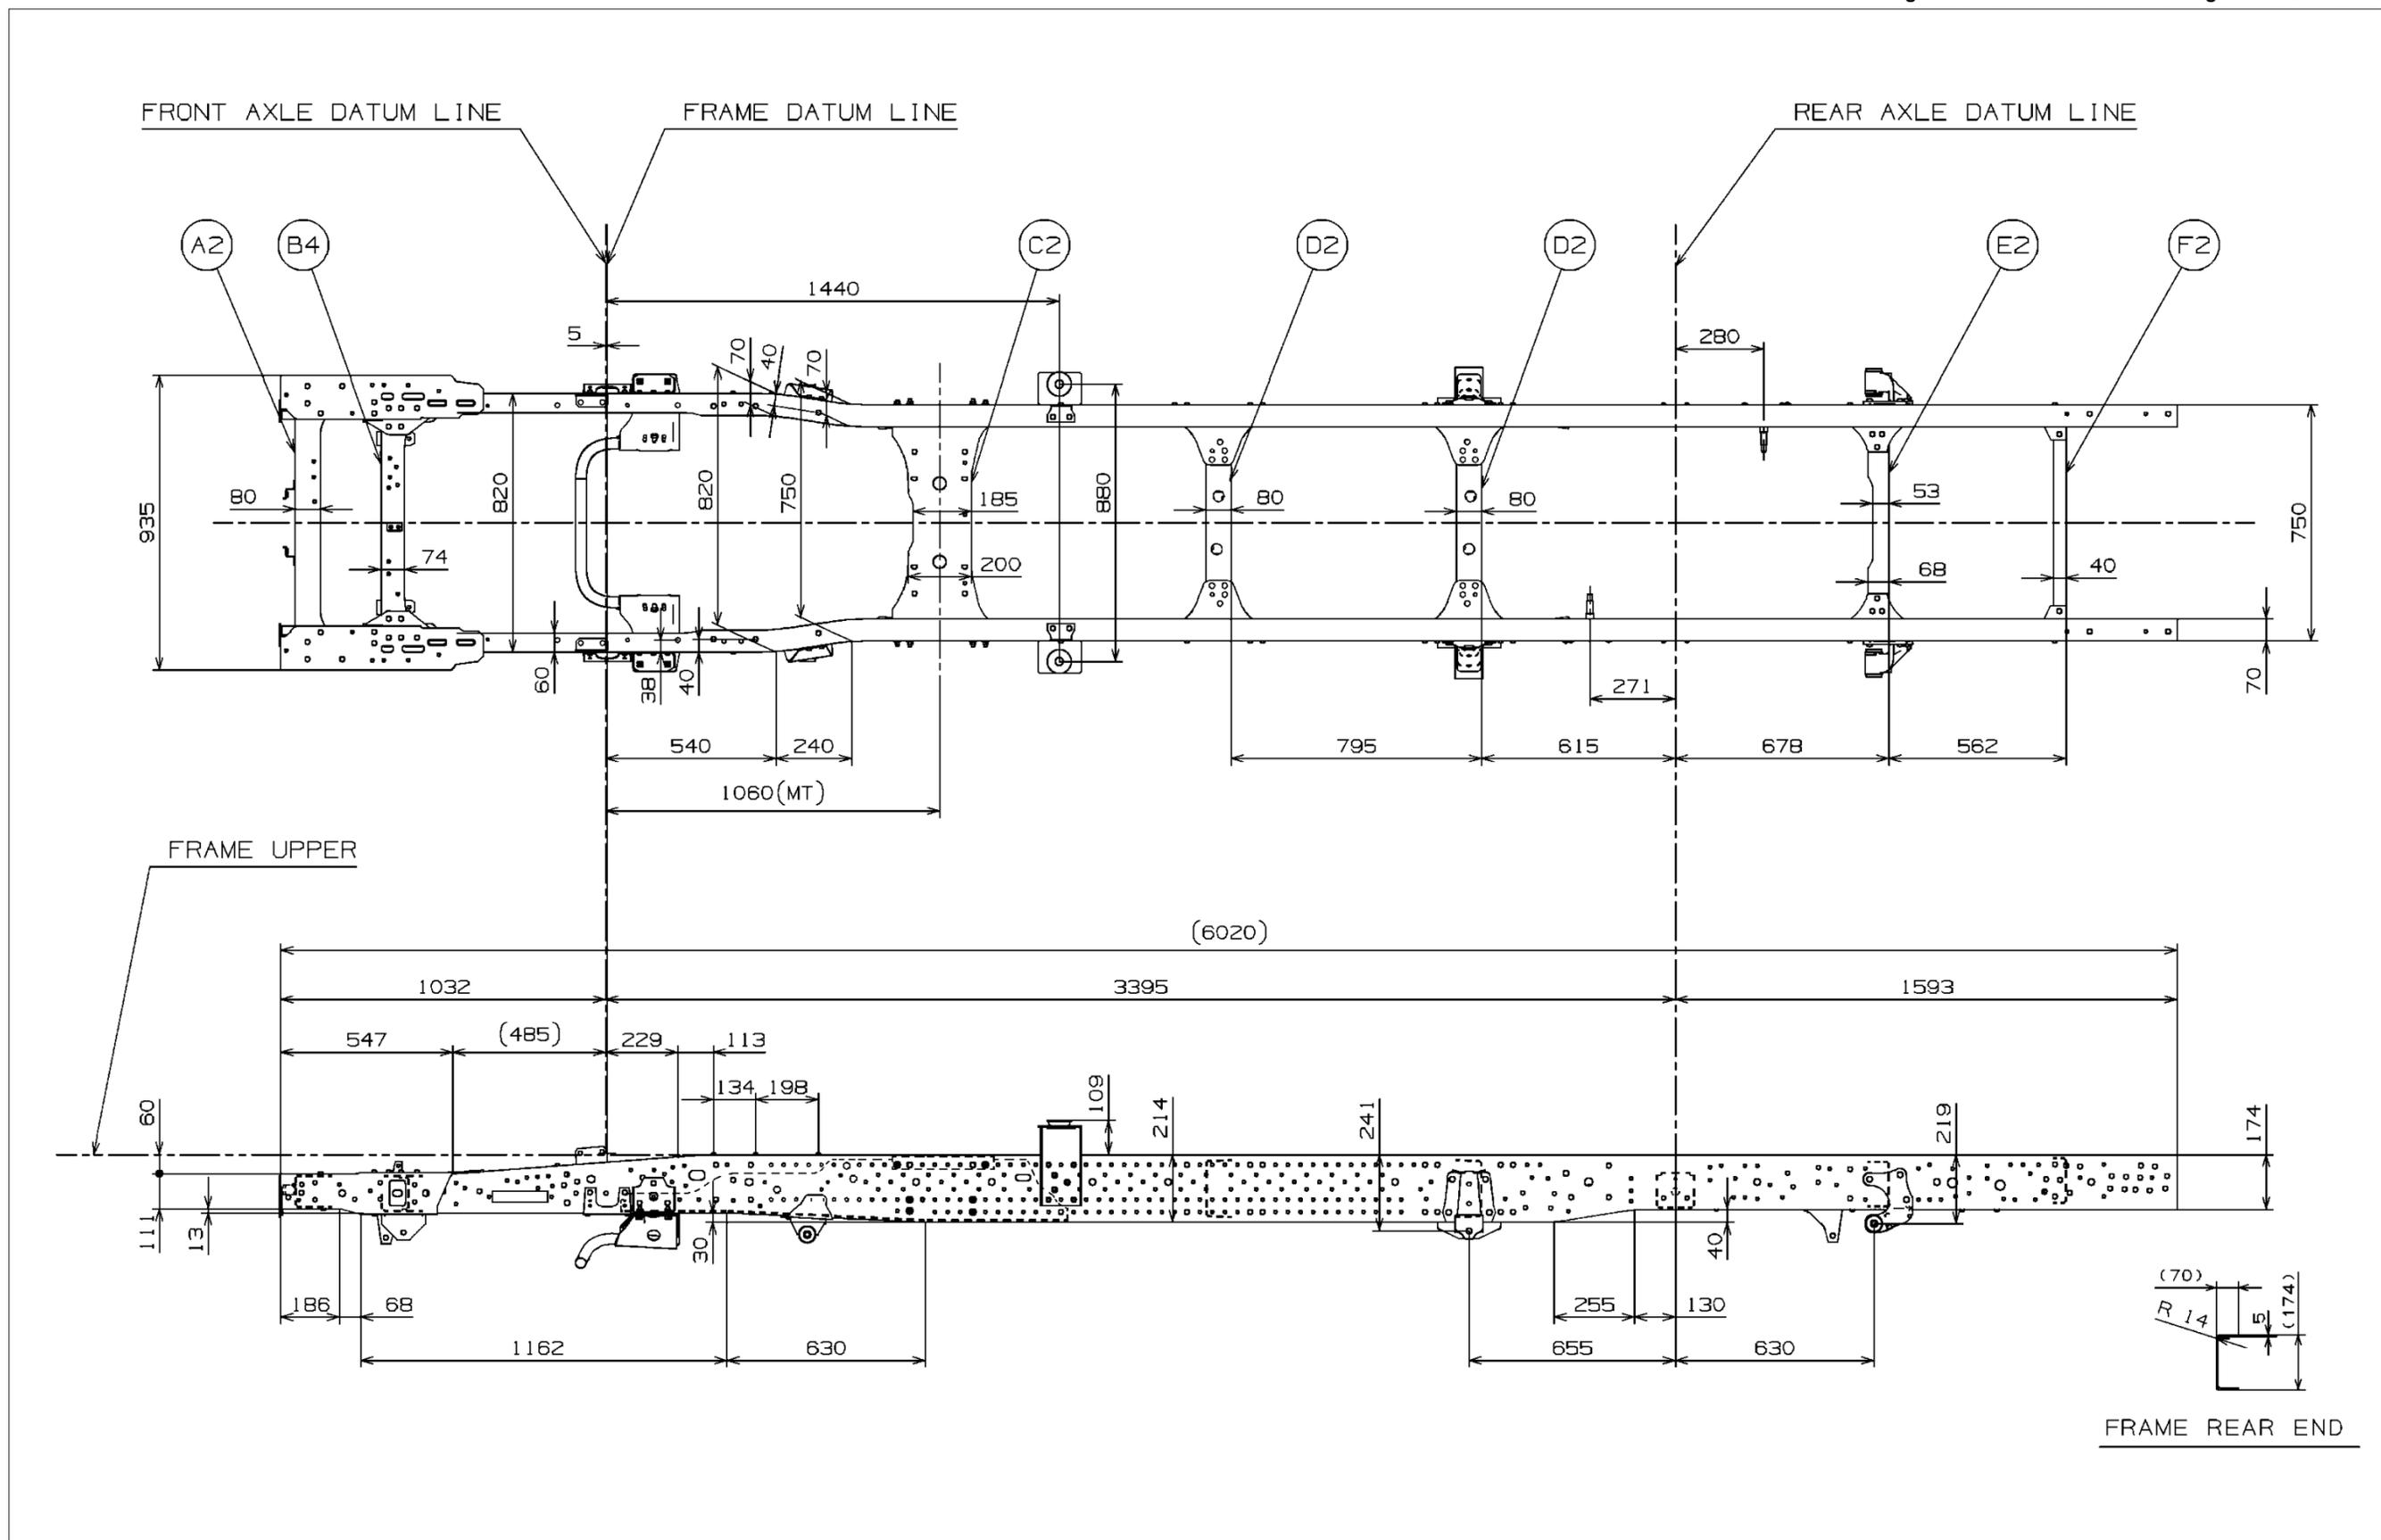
Chassis Frame Drawing NLR85AL-HD5AYE
